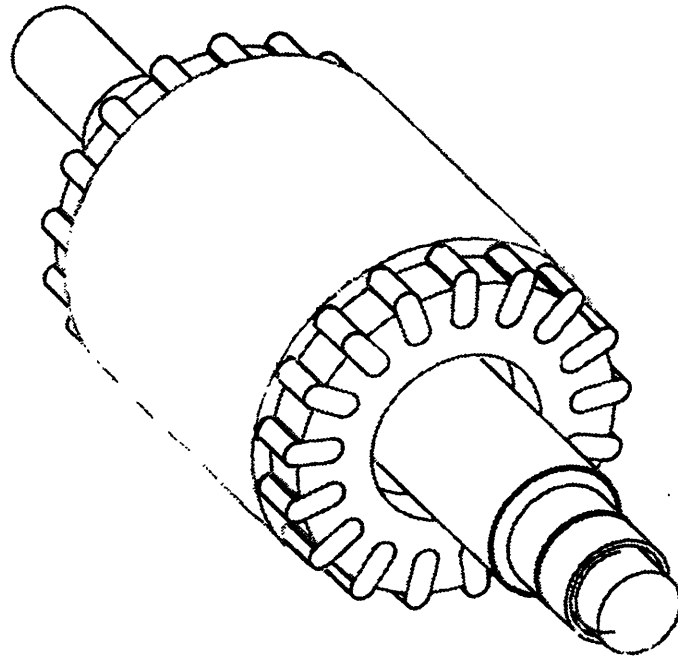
Partial assembly showing bars and end rings assembled to a closed-slot core
